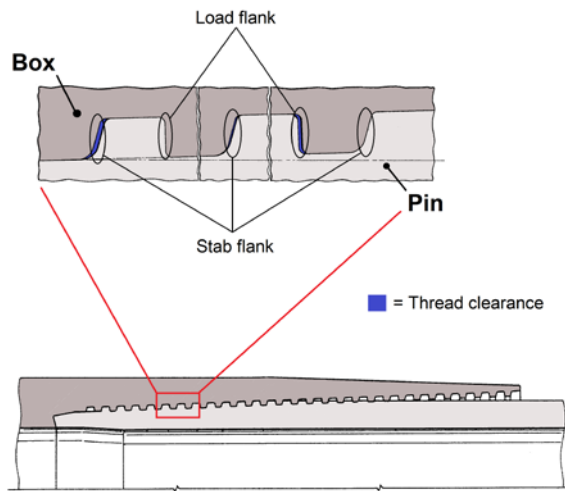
API Buttress thread with a mismatched lead reduces thread clearance resulting in excellent joint strength [6]
